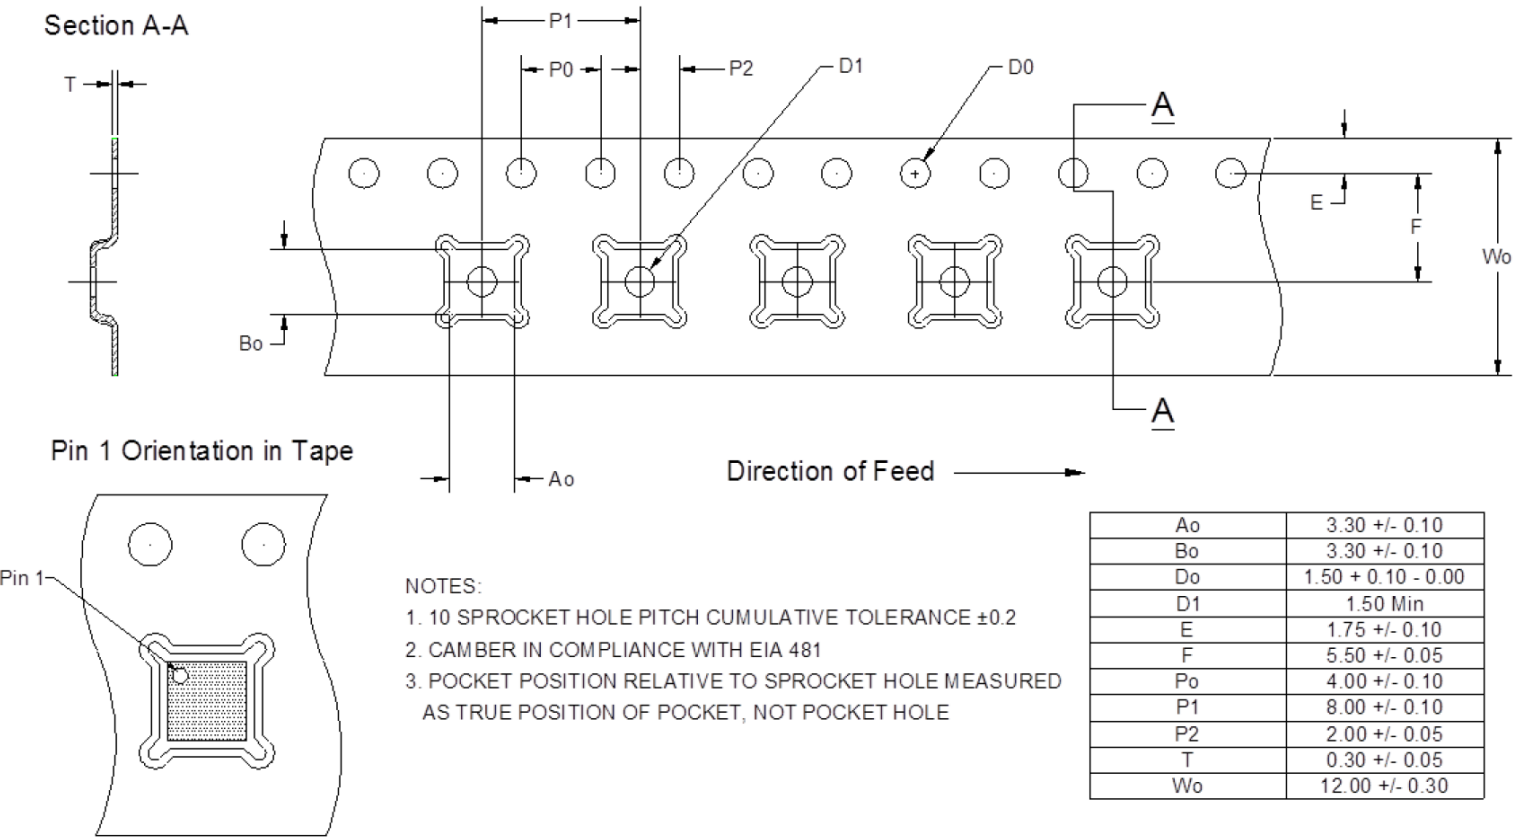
Tape and reel specification for the 12-lead 3 x 3 mm QFN package
